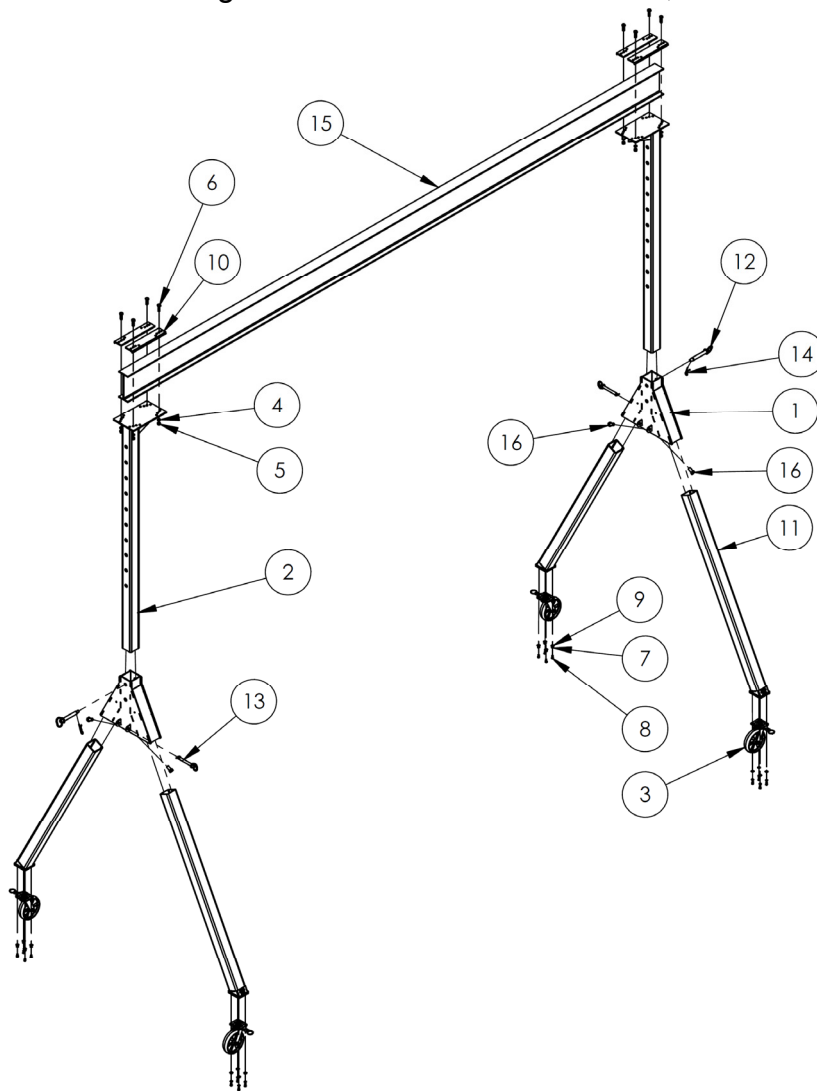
FIG. A: Exploded Parts Diagram for Models AHSN-2-10-12, AHSN-2-10-14, & AHSN-2-10-16
